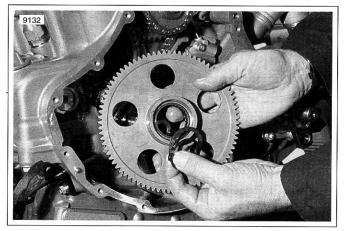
Install Needle Roller and Cage, Gear Ball Clutch and Washer
